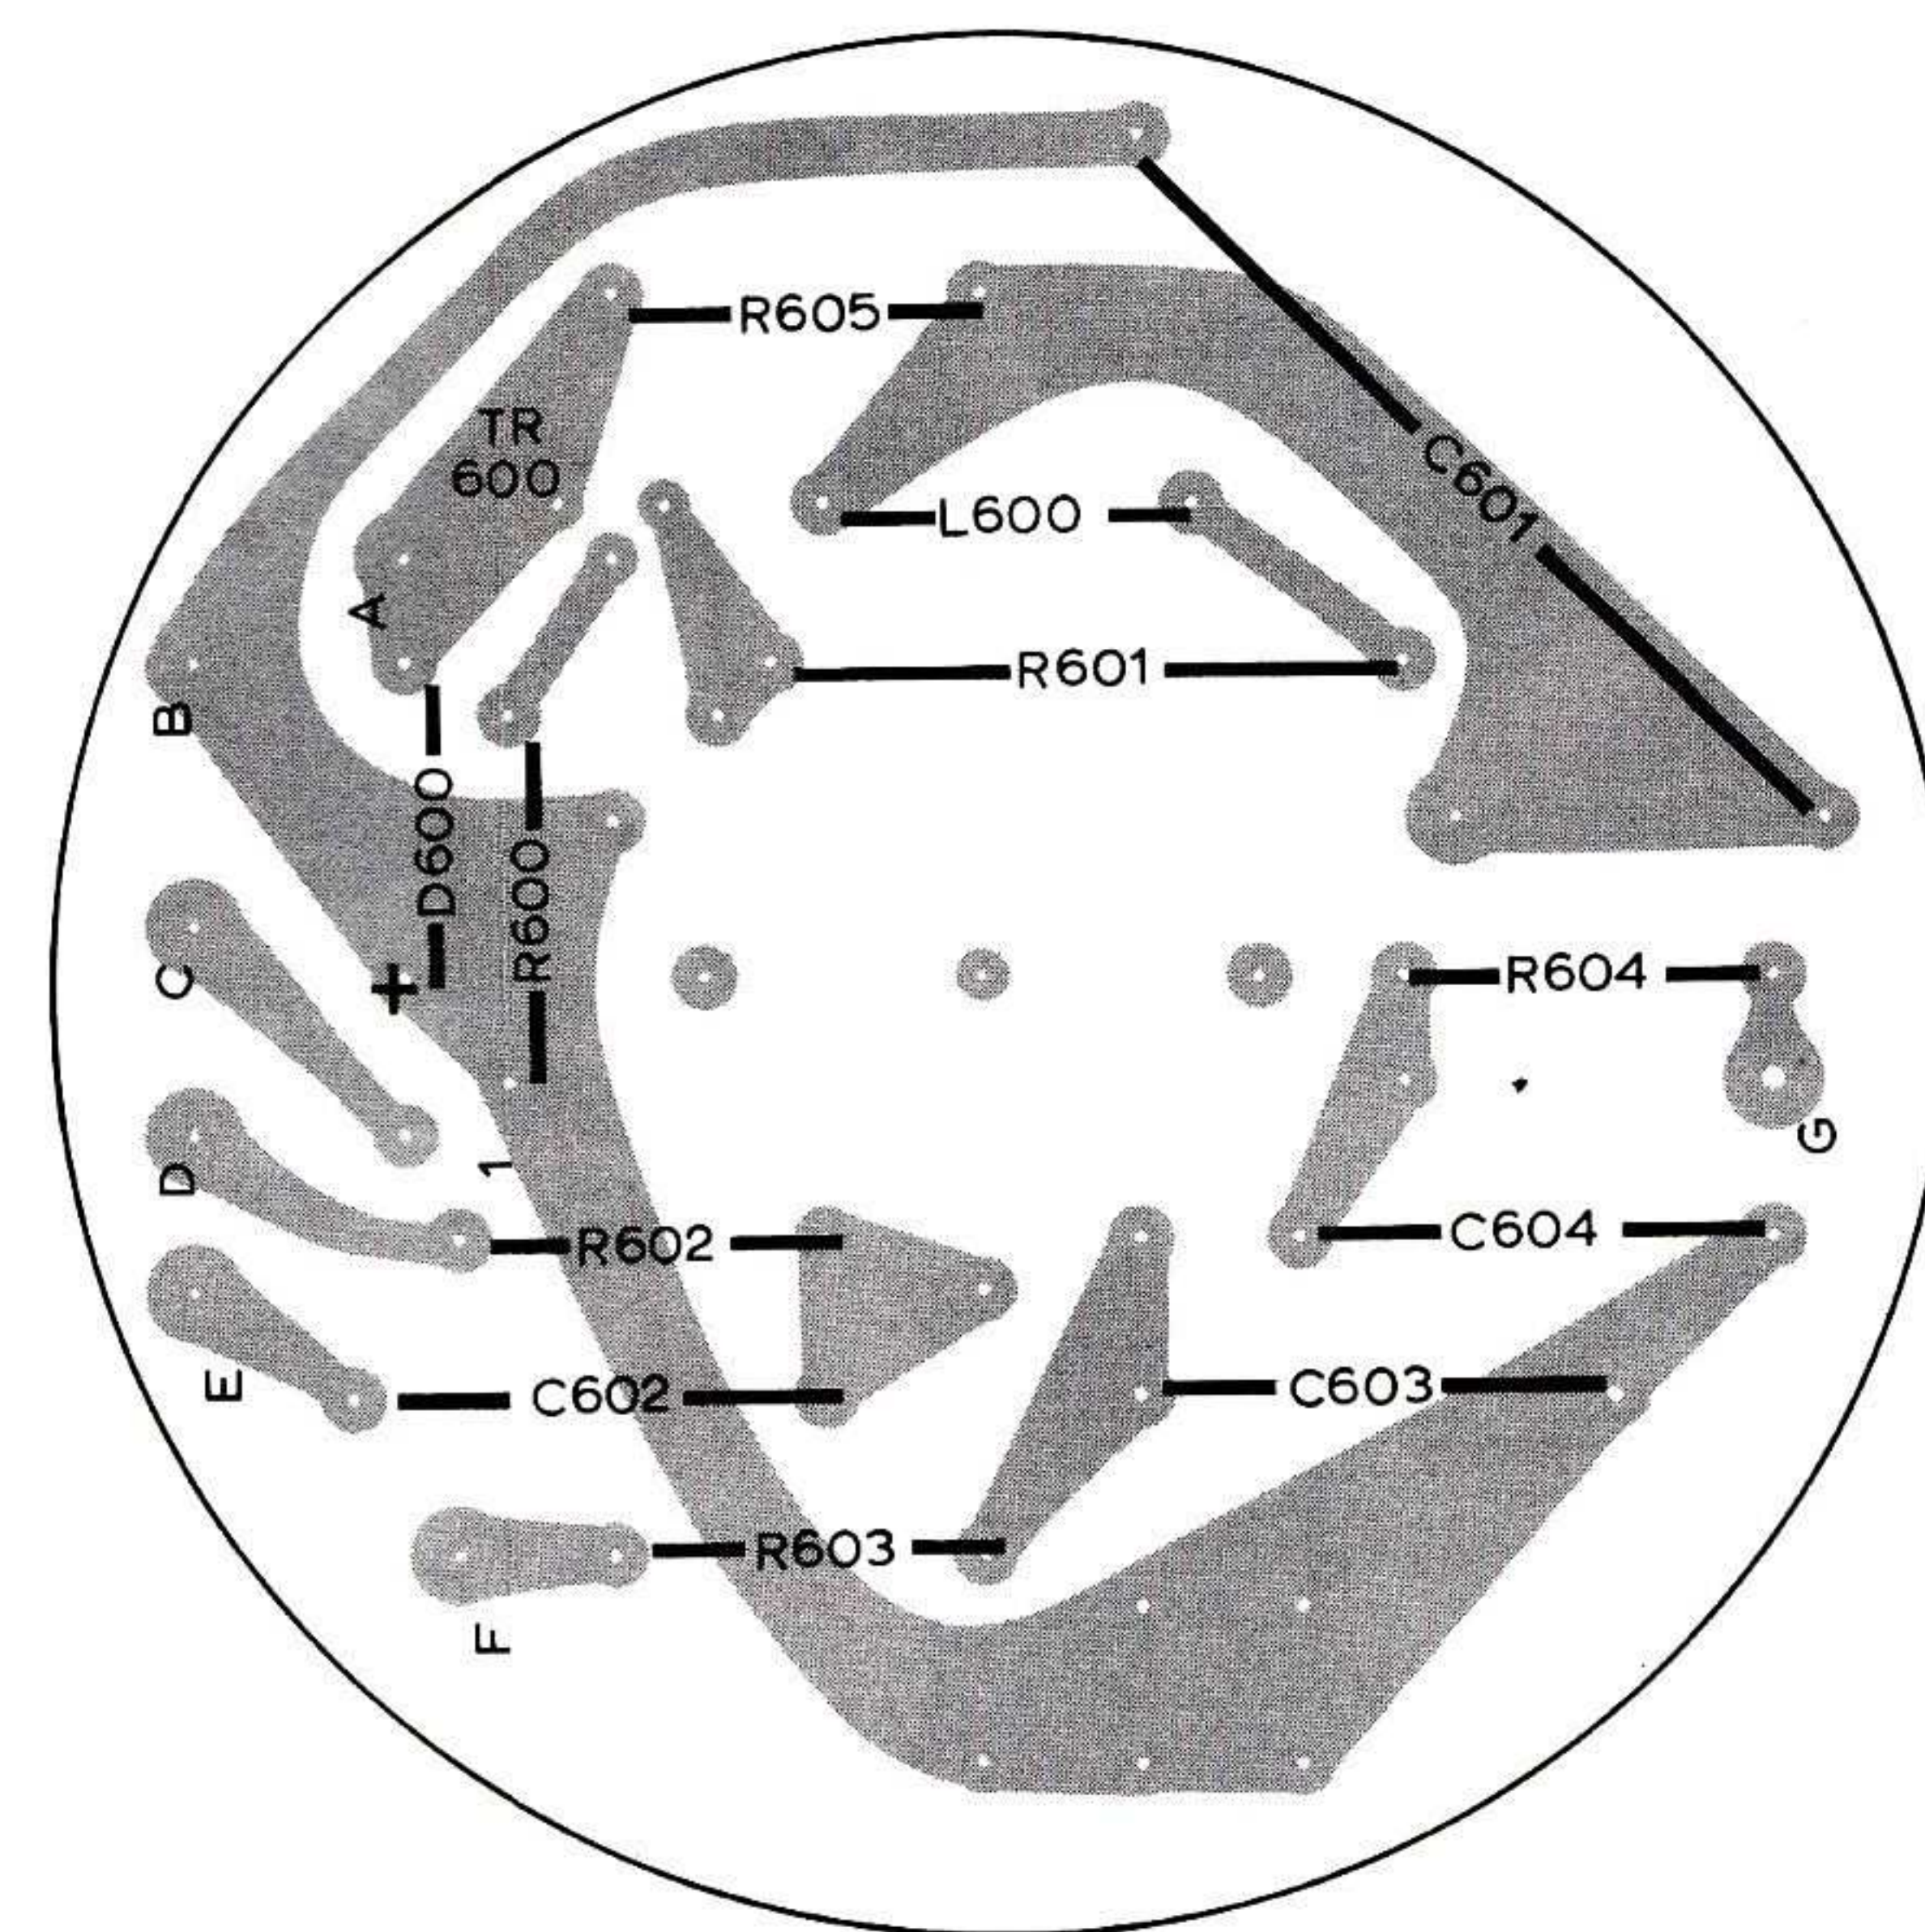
C.R.T. BASE CIRCUIT BOARD
